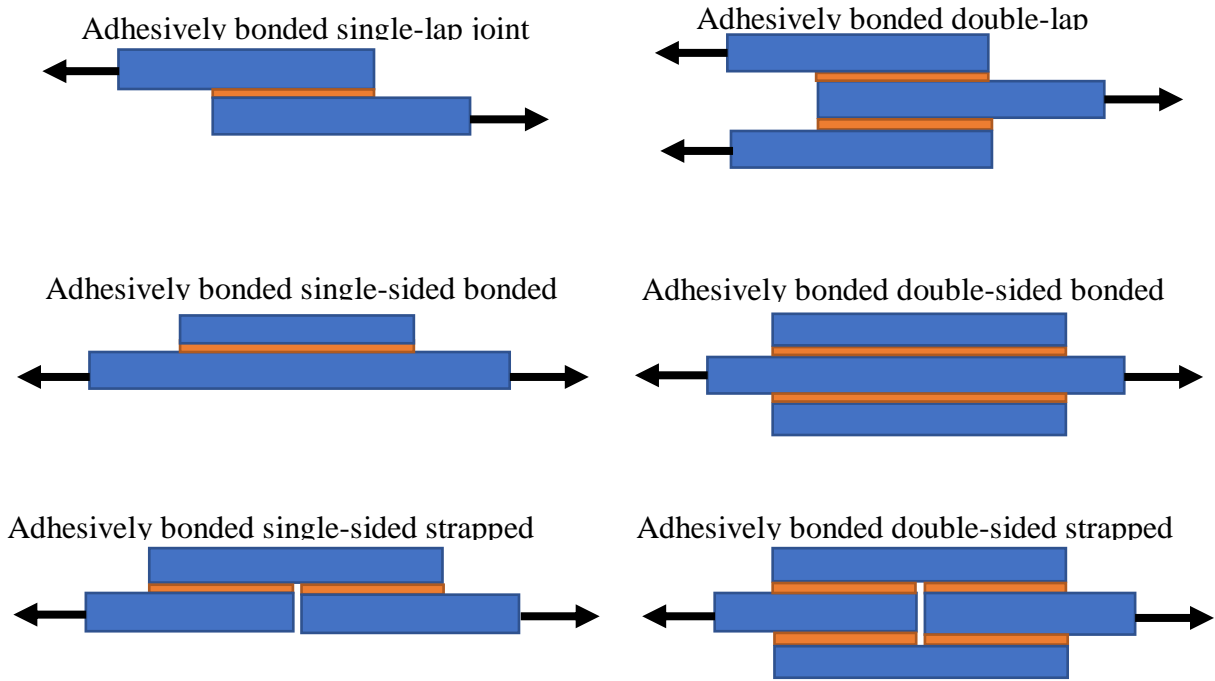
Examples of adhesively bonded joints (ABJs) types
